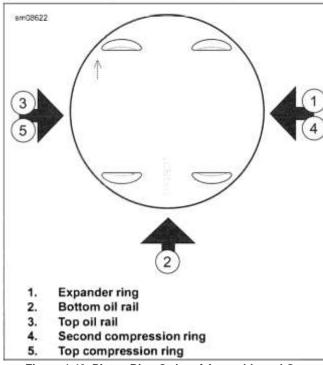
Piston Ring Order of Assembly and Gap Alignment
